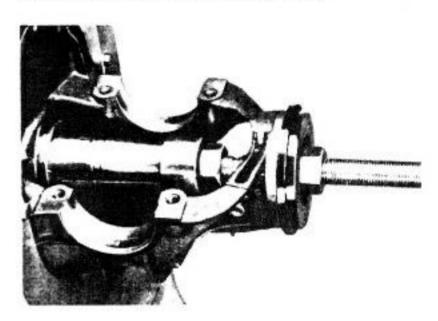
Setup for pulling the outer race of the pinion tapered-roller bearing from converter end of carrier. Sleeve on threaded spindle of extractor expands inside the bearing race and enables the race to be pulled from carrier.
